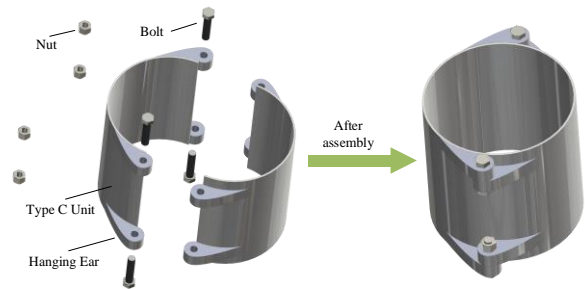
Explosion Diagram of Large Size Pipe Fitting
